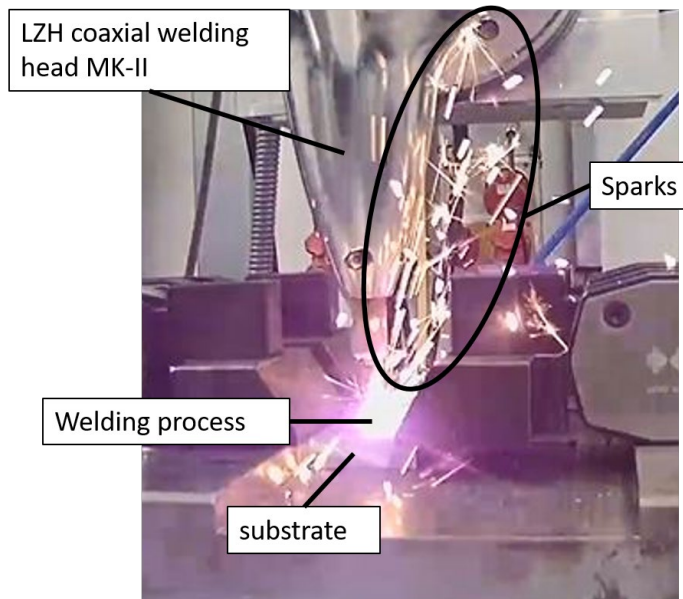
Strong sparking during the welding process with a wire feed rate of 2 m/min
